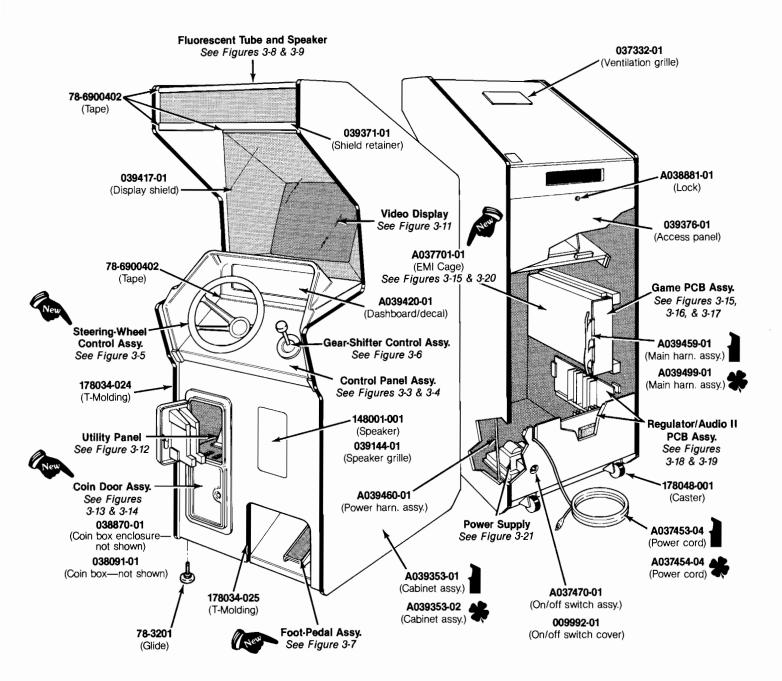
Cabinet-Mounted Assemblies U.S.-Built Upright Cabinet A039352-01 B Ireland-Built Upright Cabinet A039352-02 B
